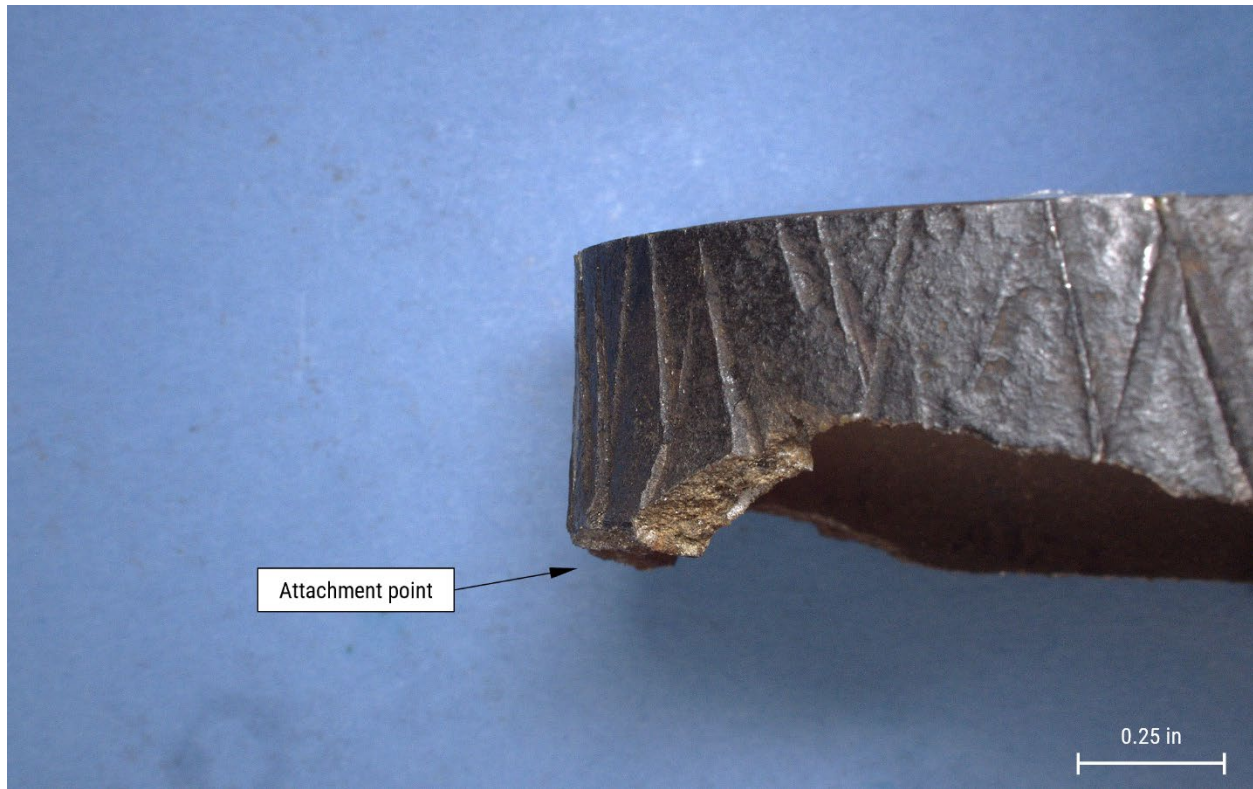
Sectioned main with fracture surface and outward bend.
